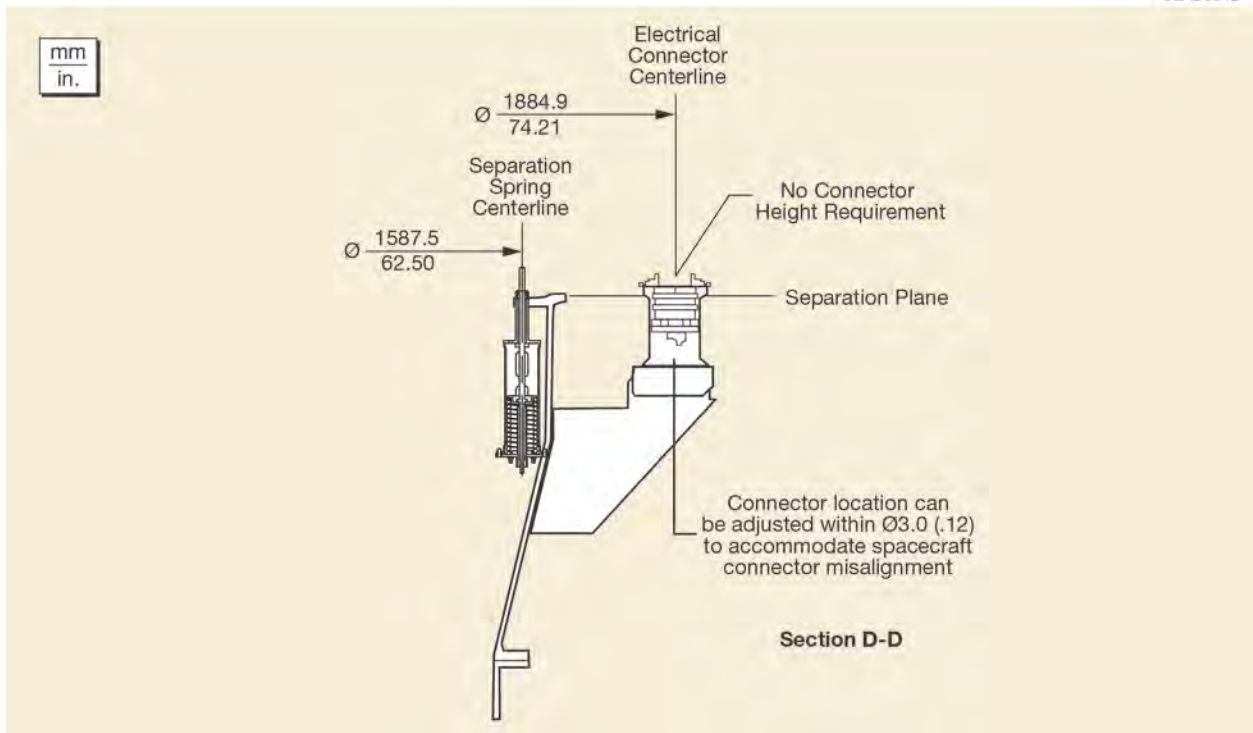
D1666 PLA Separation Spring Assembly and Electrical Connector Bracket
